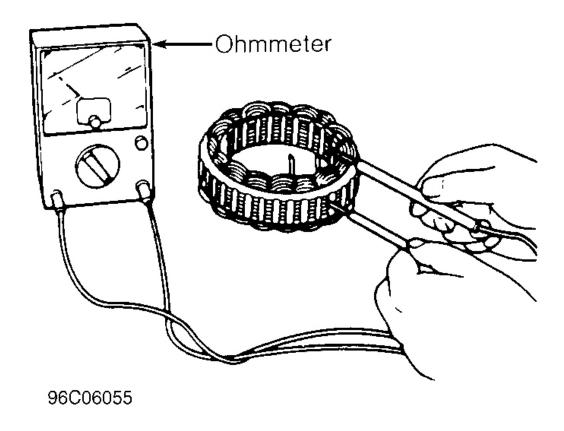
Testing Generator Stator, Rotor & Brushes Courtesy of MAZDA MOTORS CORP.
